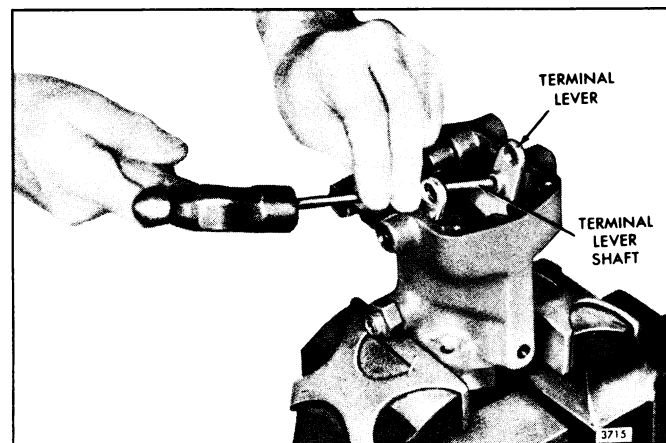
Removing Terminal Lever Shaft Cup Plug from Governor Housing
